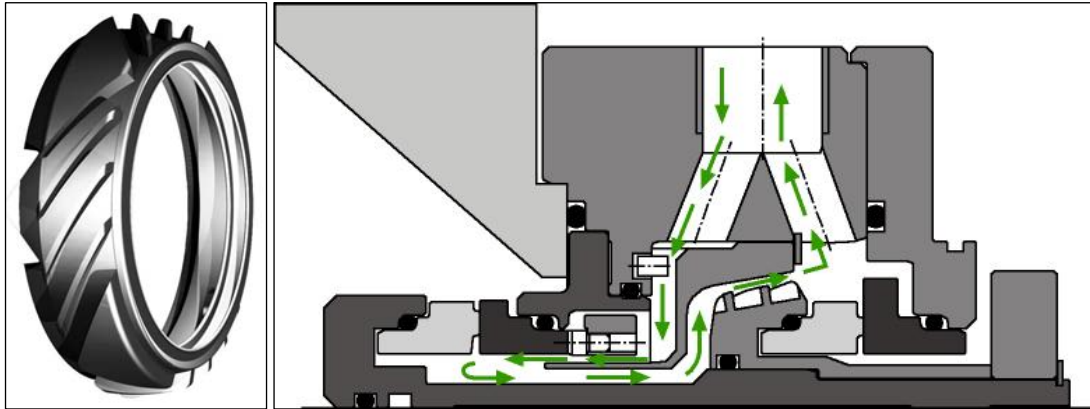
Left: view of a typical tapered vane pumping ring; right: typical position of a tapered pumping vane device within the dual seal barrier/cavity of a pump
